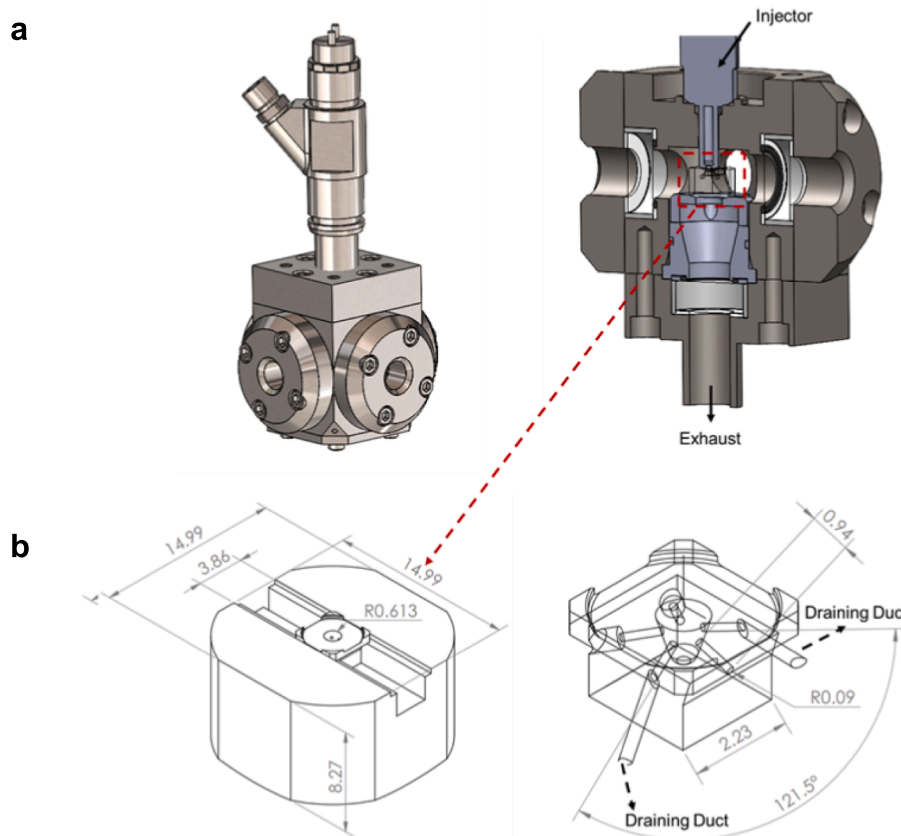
(a) Overall and section views of the spray chamber employed in the experiments. (b) CAD assembly of the Spray-M test piece with the dedicated acrylic pedestal. All dimensions are in mm.
